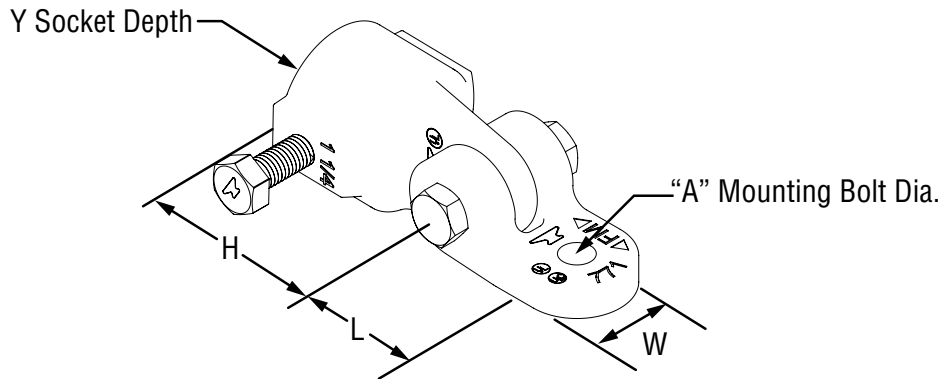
WEIGHT (LBS) • DIMENSIONS (IN)
